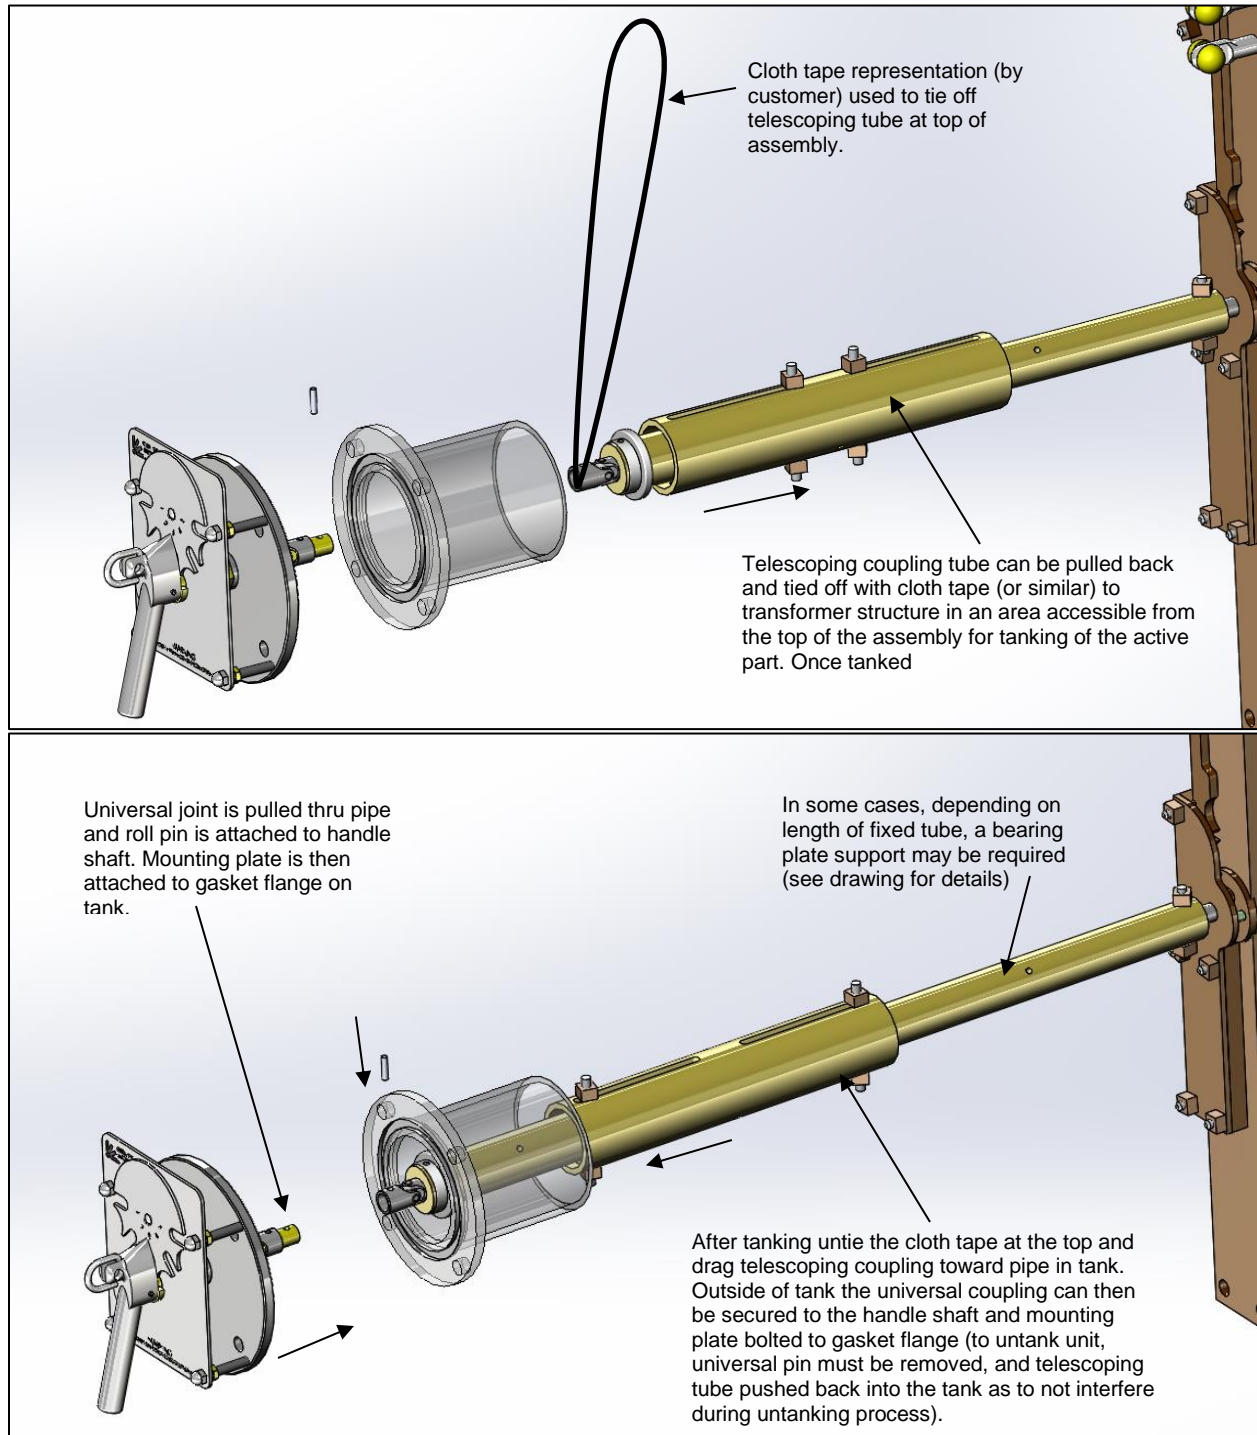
Universal Joint operating mechanism (direct connect)
